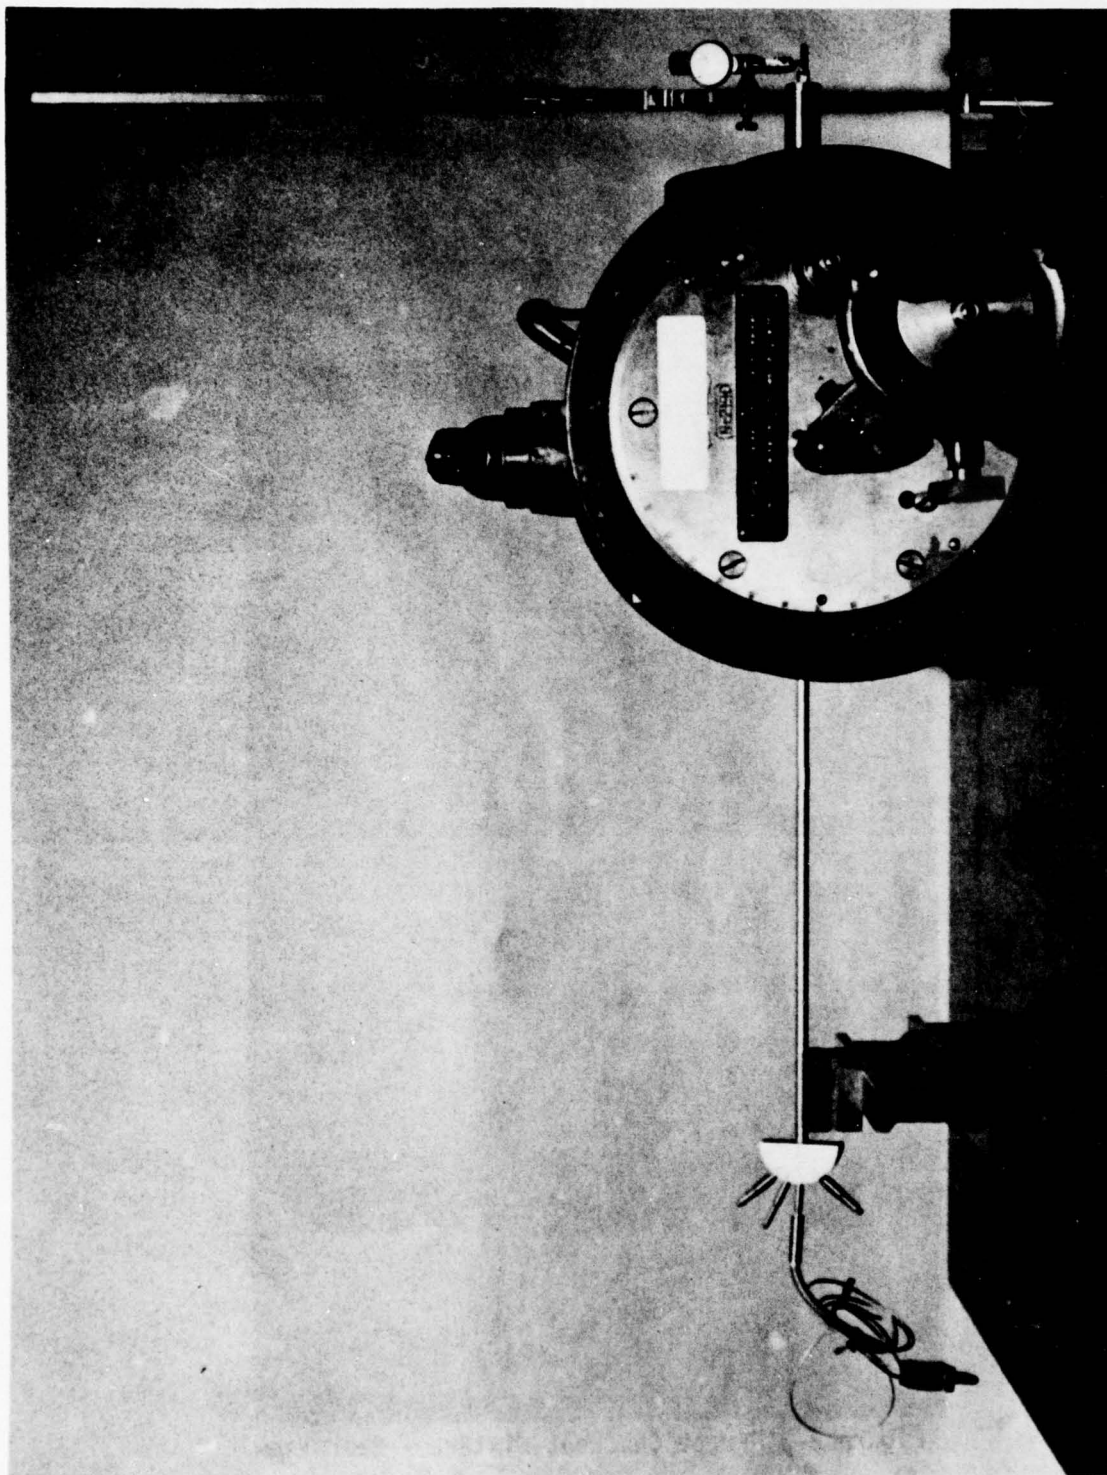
Optical Dividing Head Probe Wedge Checkout
